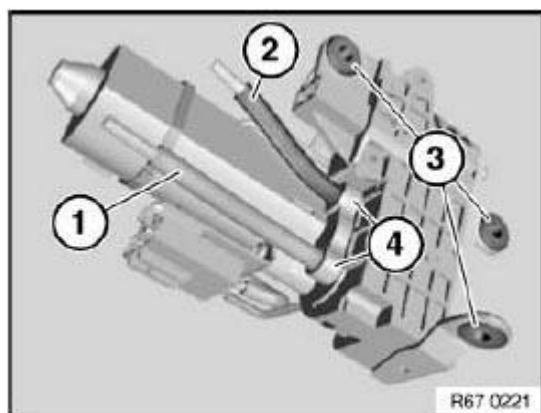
Identifying Drive Shafts, Associated Mountings And Plastic Mount
